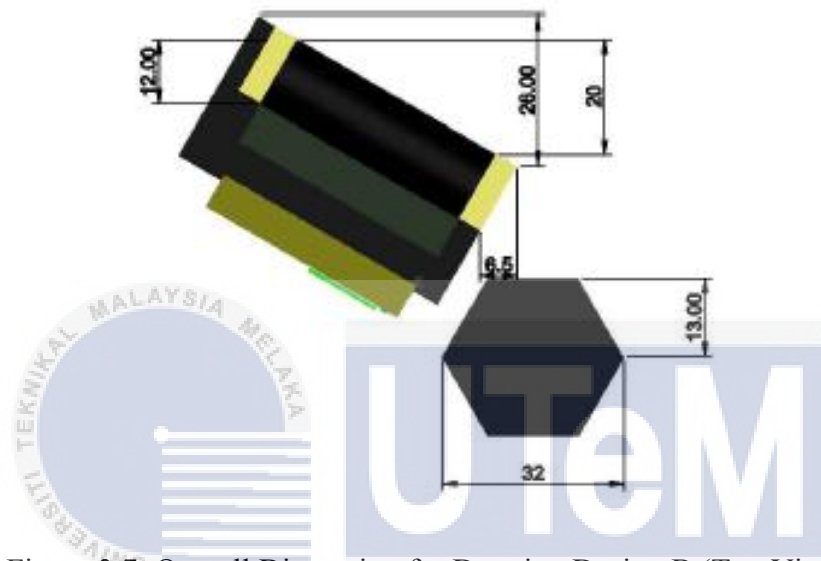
Overall Dimension for Drawing Design B (Top View)
